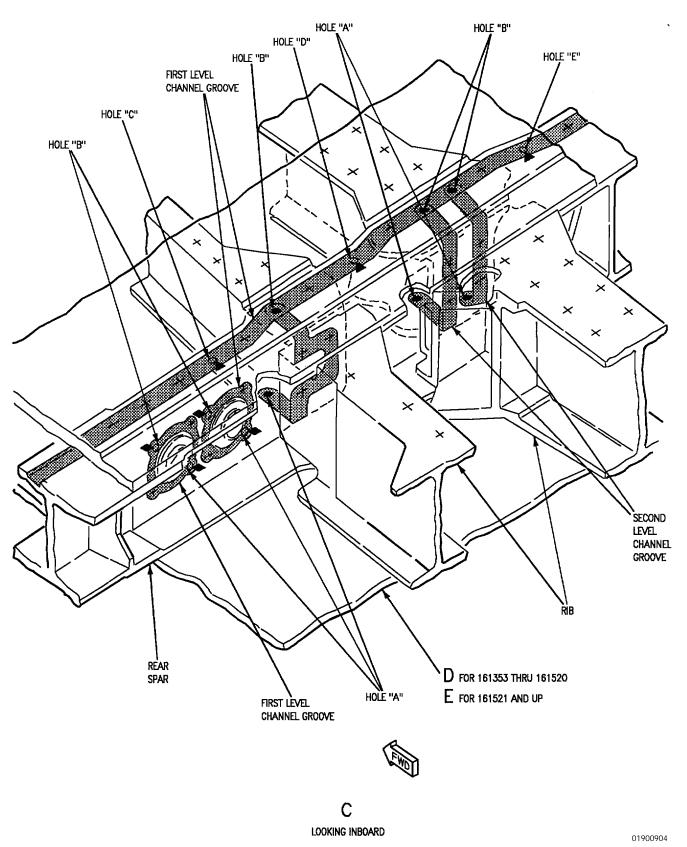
Rear Spar Channel Groove Seal Injection (Sheet 4)
